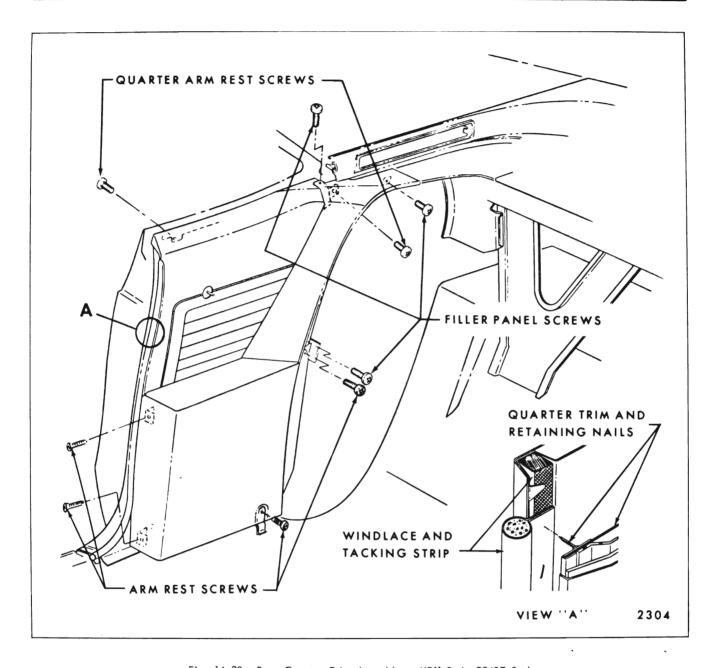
Rear Quarter Trim Assembly - "E" Body 39487 Style
